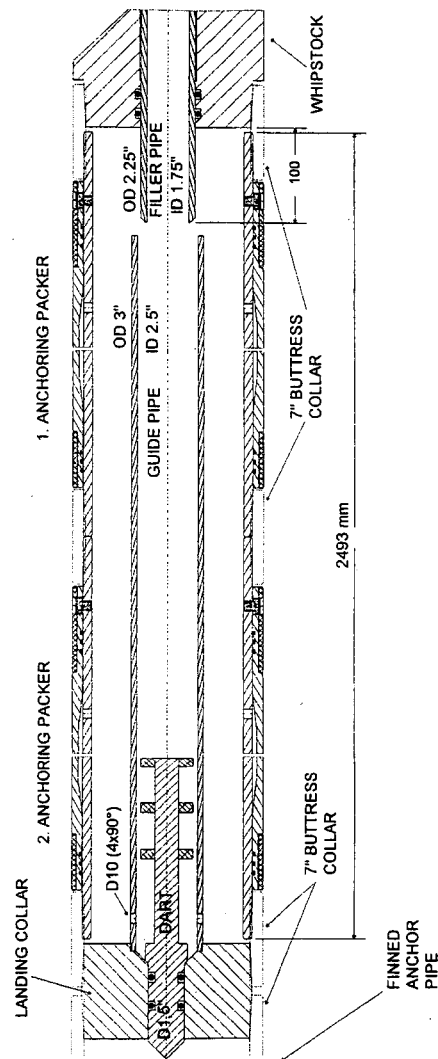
Whipstock - packer assembly for a possible side-track in GPK2.
